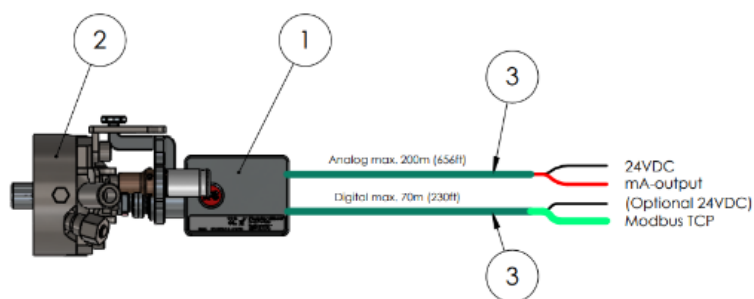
Retractable refractometer DCM-20 PASVE® system for green liquor (Drawing 10780).
